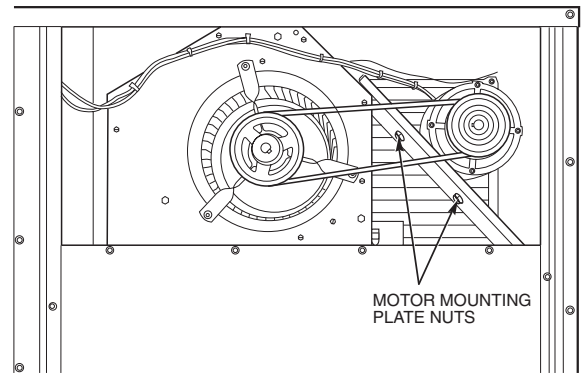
Typical Belt-Drive Motor Mounting for Sizes 090-103
